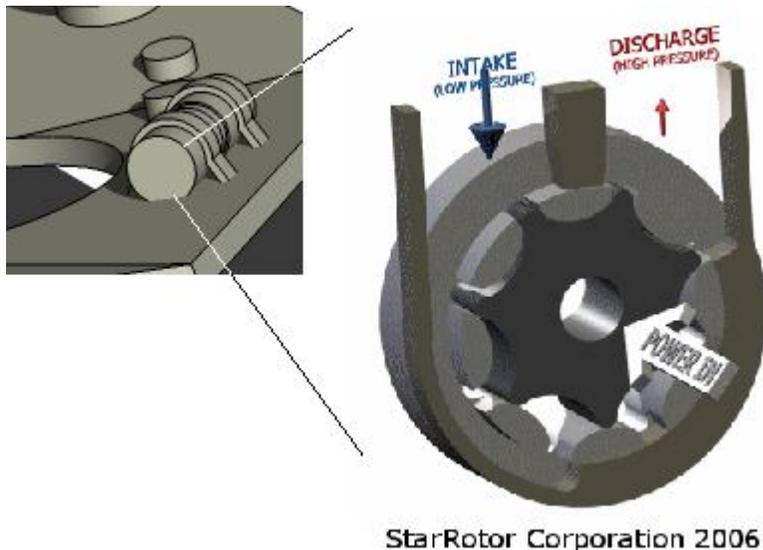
StarRotor Compressor operation: for 7 rotations of the outer rotor, the inner rotor rotates 8 times. The parts are sealed by close clearance, they don't actually touch during normal operation. There is a parallel gearbox with synchronization gears. Anyone who gets into the nitty gritty of atmospheric ISRU will soon discover that the chemical reactions, while key, are not the major part of the challenge.
